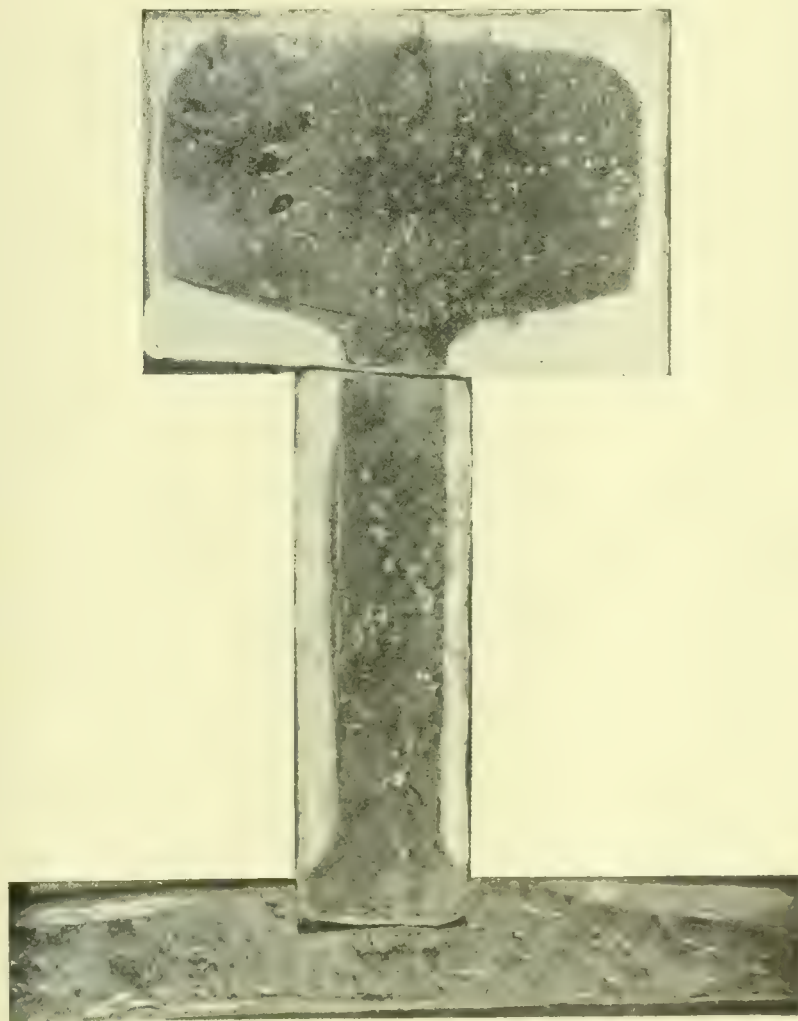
PRINT FROM FRACTURE OF A STEEL RAIL.
